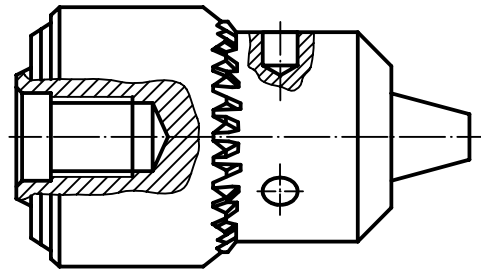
Three-jaw drill chuck — Internal thread mount type
